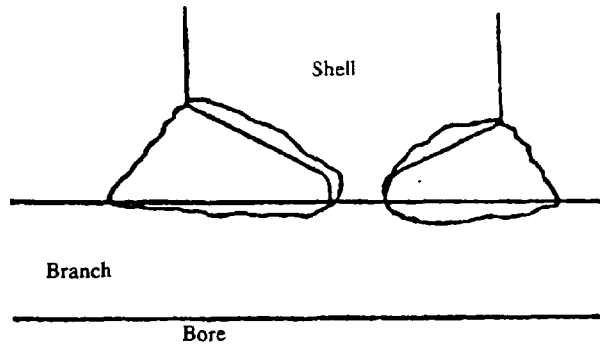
d : Partial penetration "set through" weld.
